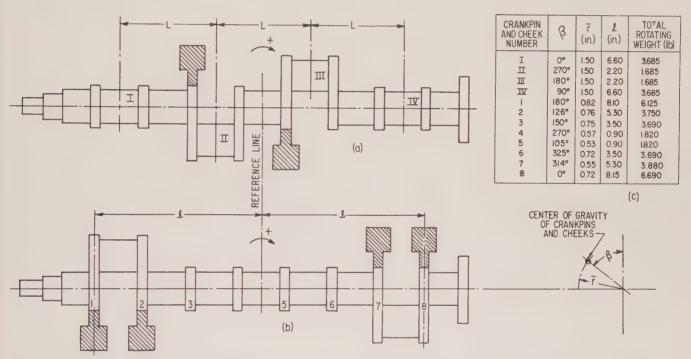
The four middle cylinders of the V-8 engine had to be removed before the engine could be used as a four-cylinder laboratory test engine. This left only the four outer pistons and rods, located on crankpins I and IV. The location of crankpins I, II, III, IV is indicated in the plan view (a) of the crankshaft. The left side view of the crankshaft (b) shows the eight cheeks and counterweights. The cross-hatched areas represent the counterweights. In the drawings, β is the angle of center of gravity location with respect to
